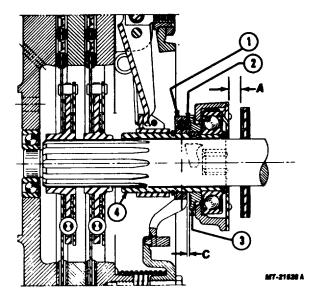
Release Bearing Adjustment (Lipe LPA Clutch) (Self-Adjuster Type)
